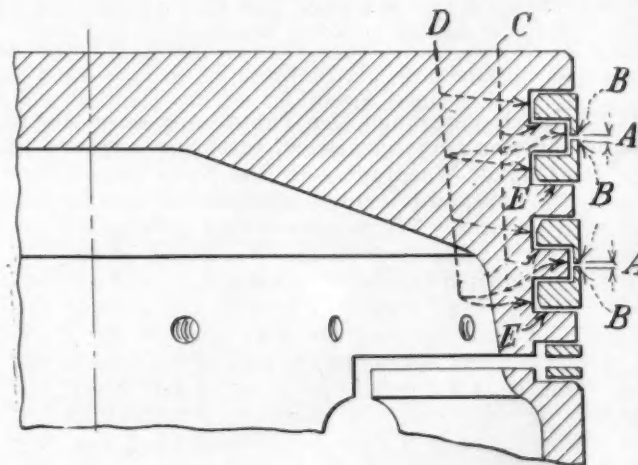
TUNGITE OIL-TRAPPING RINGS AND PISTON-HEAD
